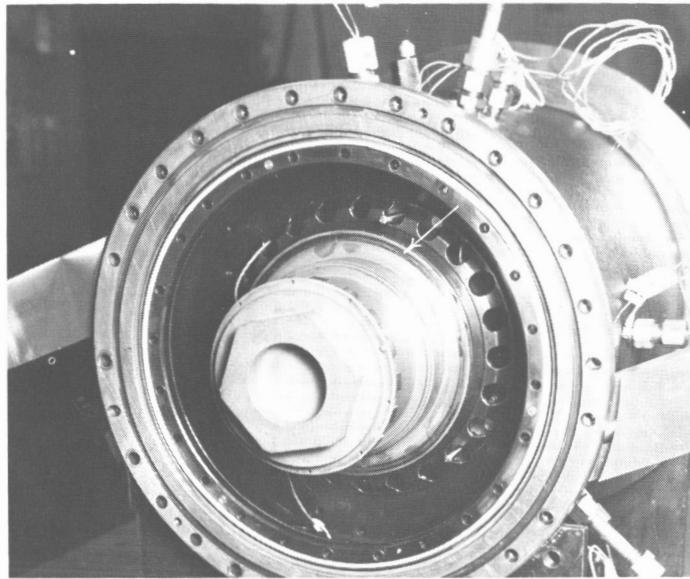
Mainshaft Seal Rig 29,360 - Rig Hub Assembly After 16.0 Hours Running of the Preliminary Dynamic Checkout Program on the P&WA Rubbing Contact Seal With Piston Ring Secondary. Note: Carbon Wear Path on Seal Plate XP-64577
